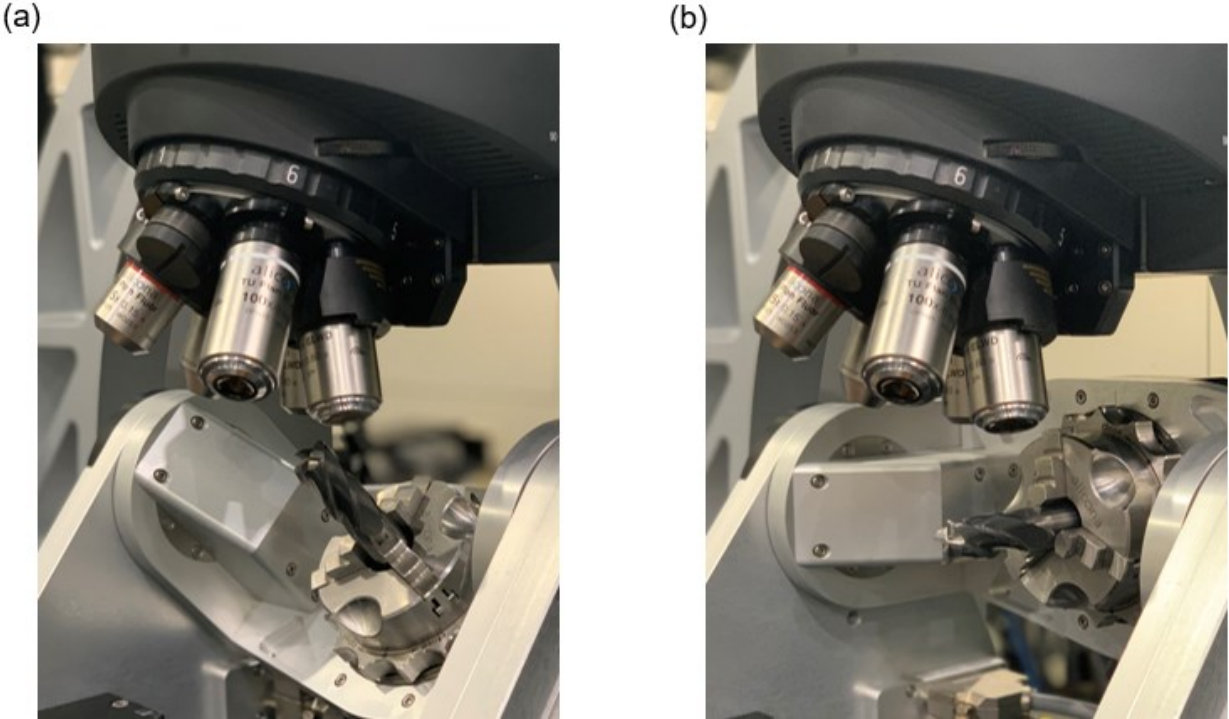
Measuring Setup for (a) Bottom Edges (b) Peripheral Edges of a Solid Tool.
